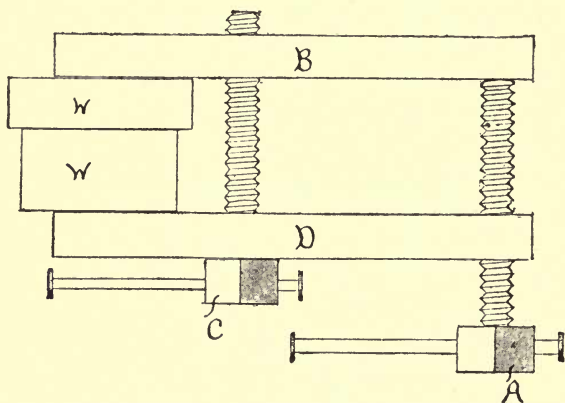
Adjustable Clamp made from scrap iron and set-screws, for holding small glued work.
